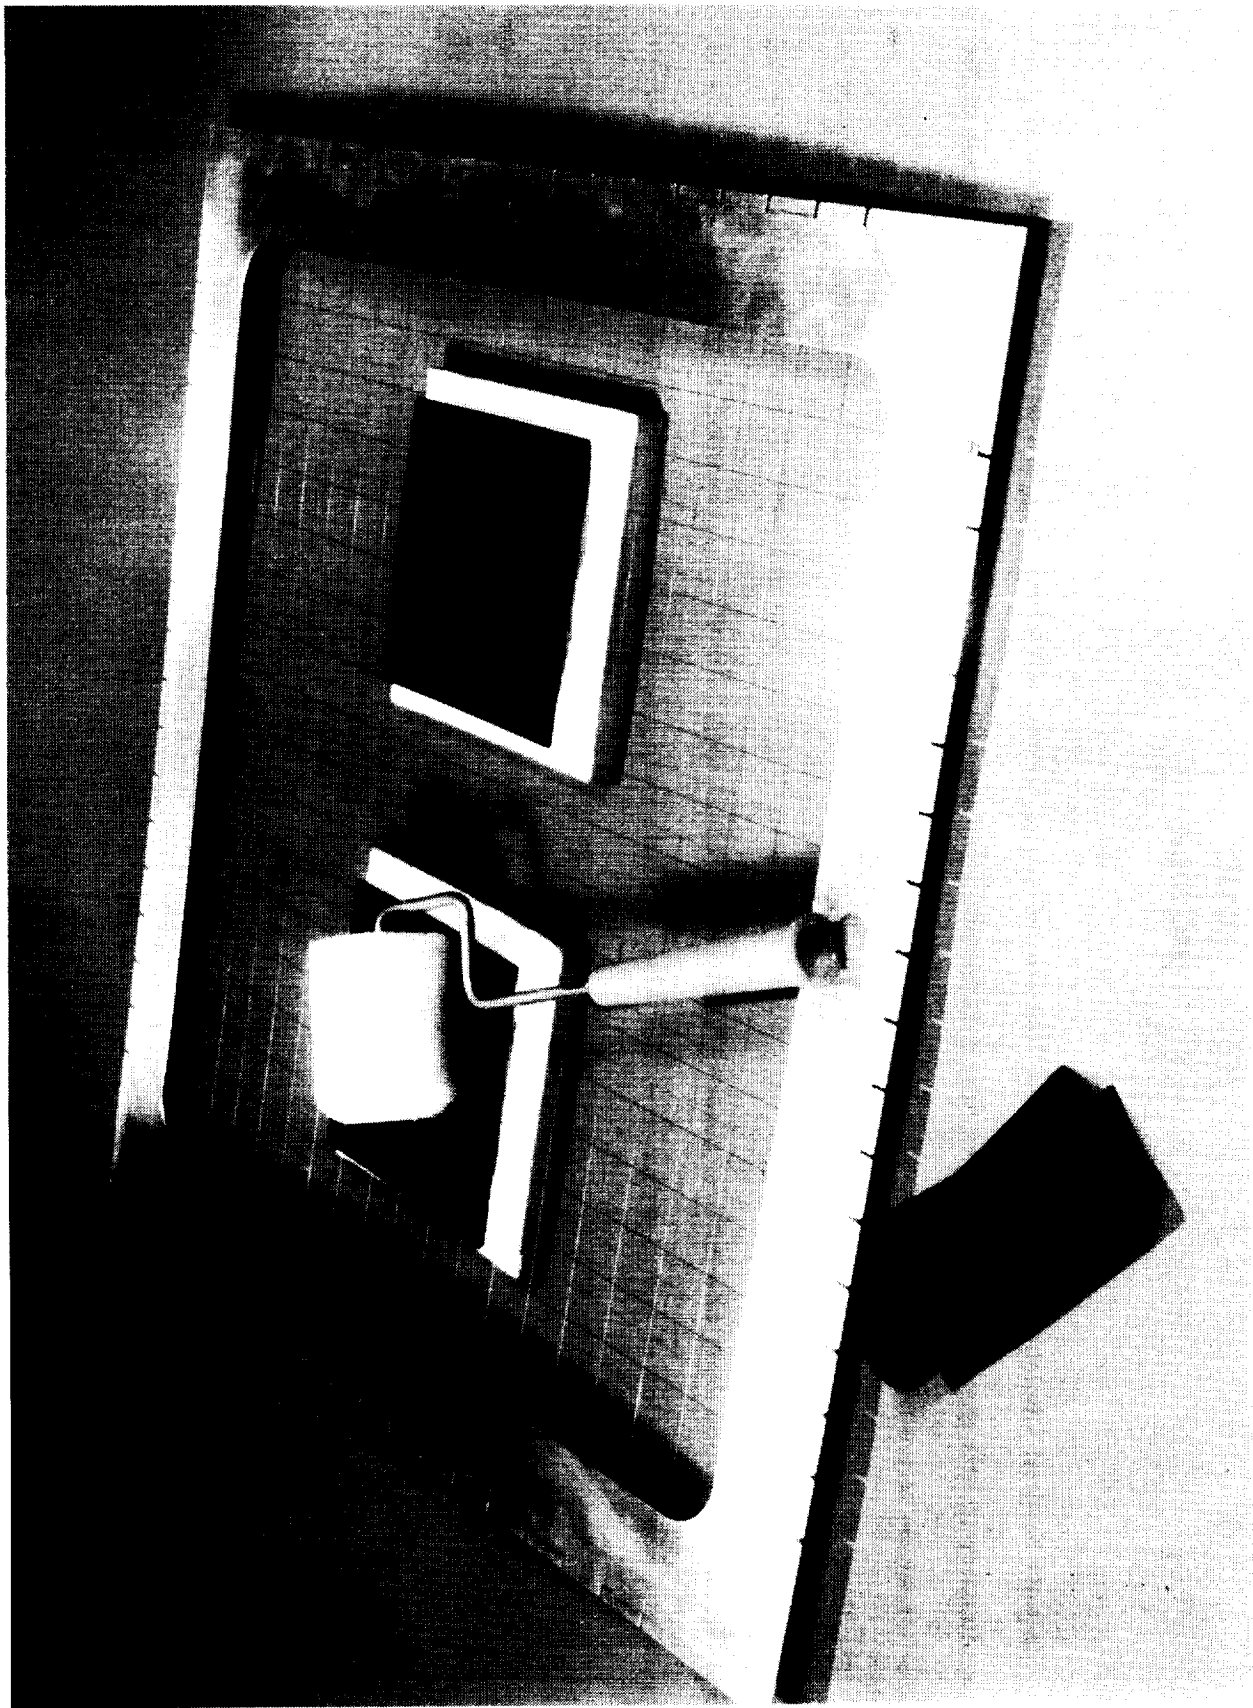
The most effective technique developed to apply RTV adhesive to the tile-SIP assembly.
